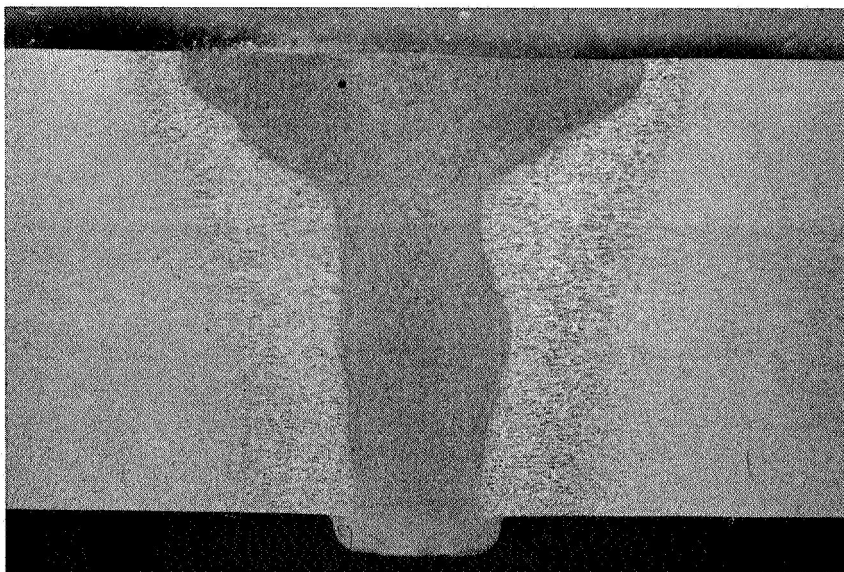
Out-of-Vacuum Electron Beam Weld in
